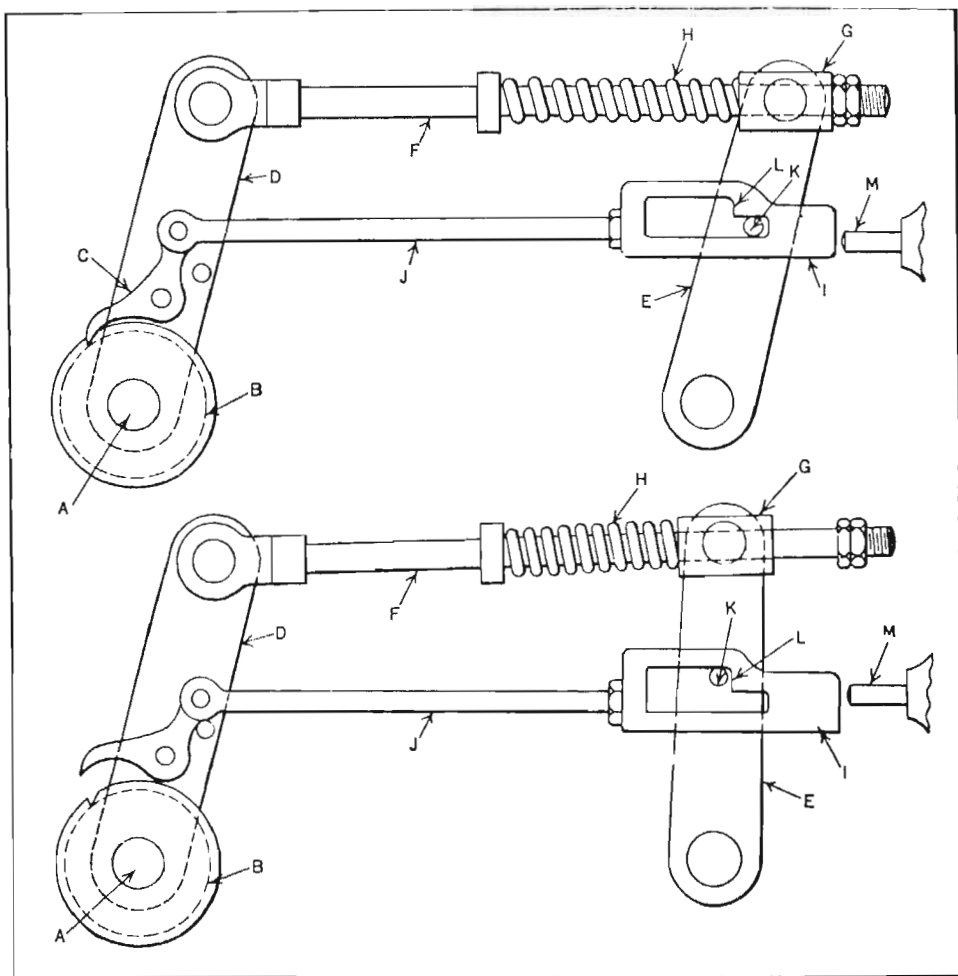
Ratchet Feed with Attachment for Protecting Mechanism and Stopping Machine if Feed Jams
